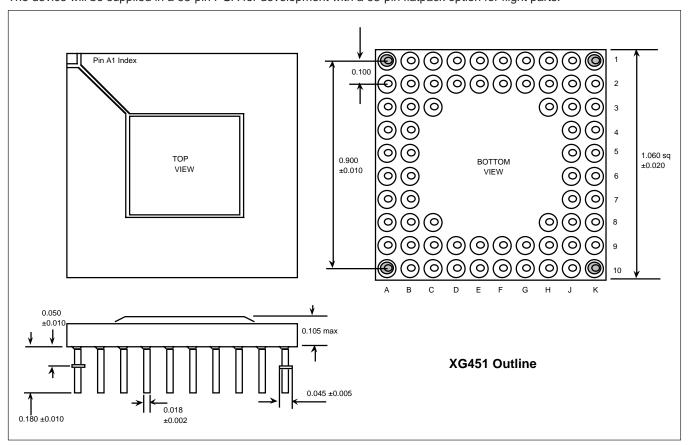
Dimensioned Drawing for the 68-pin PGA Package
